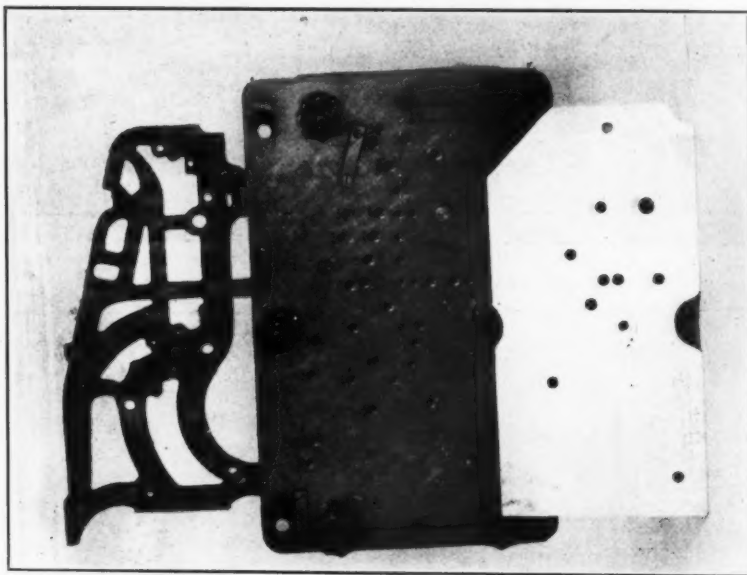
LEFT SIDE FRAME B47, DRILL JIG AND MASK PLATE
